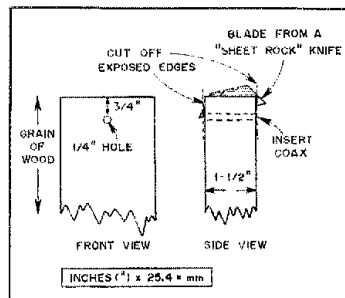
Construction details of a jig for stripping the outer insulation from large amounts of coaxial cable. [Exposed edges of the blade could be cut or ground off as a safety measure — Ed.]
